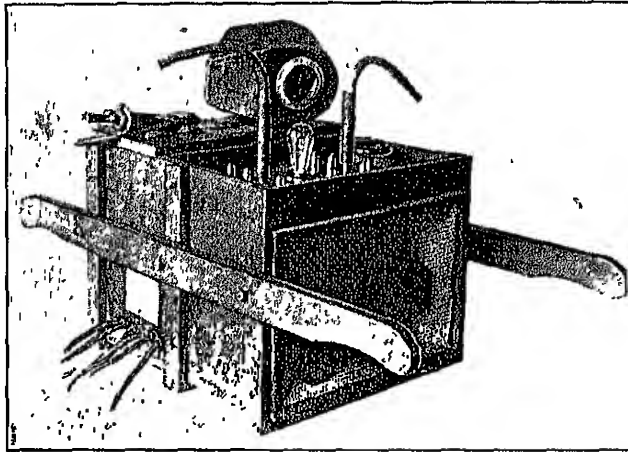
Apparatus Made by the Electric Arc Cutting and Welding Co.
